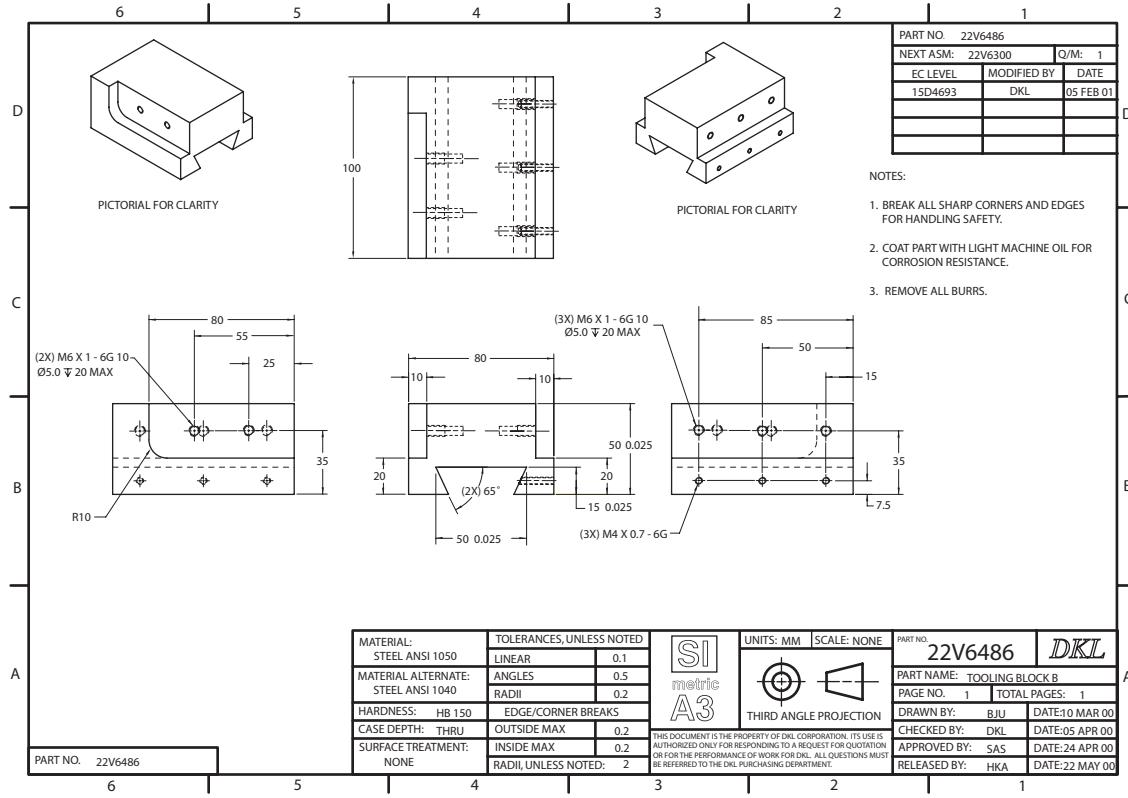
A formal drawing of a tooling block presented in the preferred multiview configuration showing all hidden lines. All
